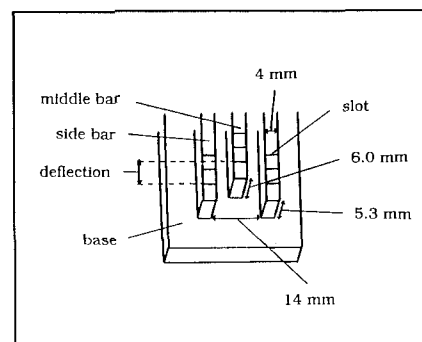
Diagram of a test jig showing its components and measurements of various dimensions.
